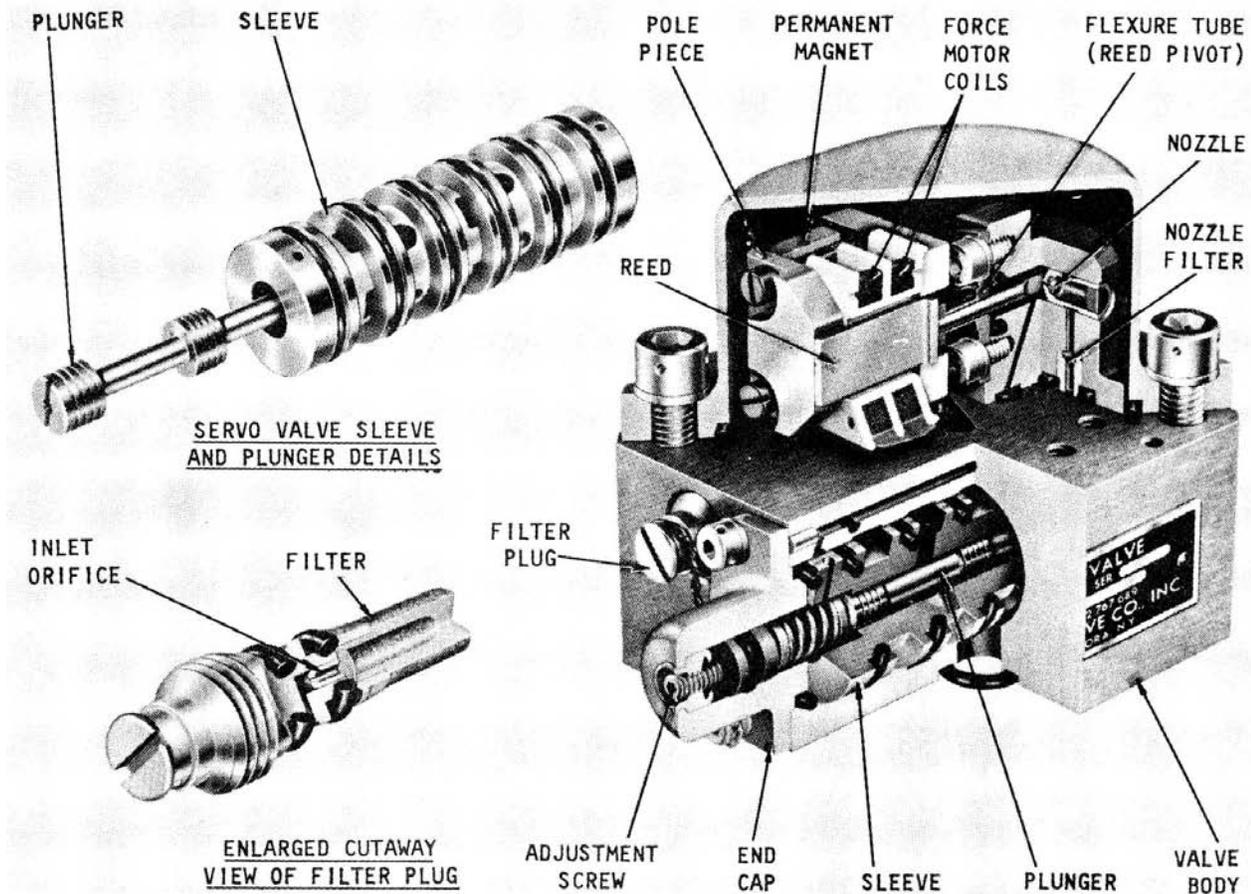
Electrohydraulic servovalve cutaway view.
